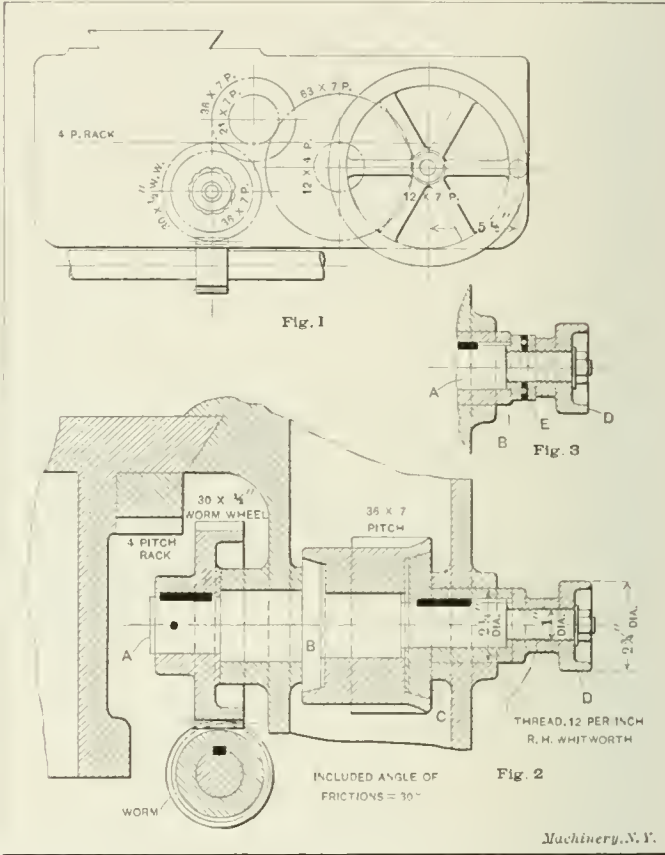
Elevation of Lathe Apron showing Position of Gears for Longitudinal Feed. Fig. 2. Sectional View showing Feed Arrangement. Fig. 3. How Thrust-bearing was applied
